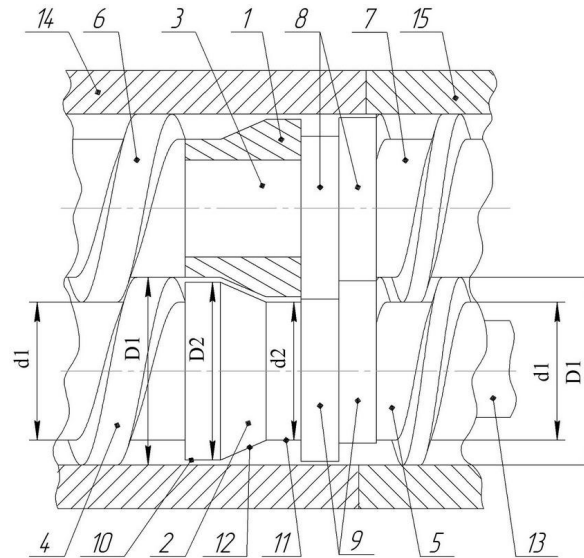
Layout of cylindrical-cone nozzles on the shafts of a twin-screw extrusion press.
